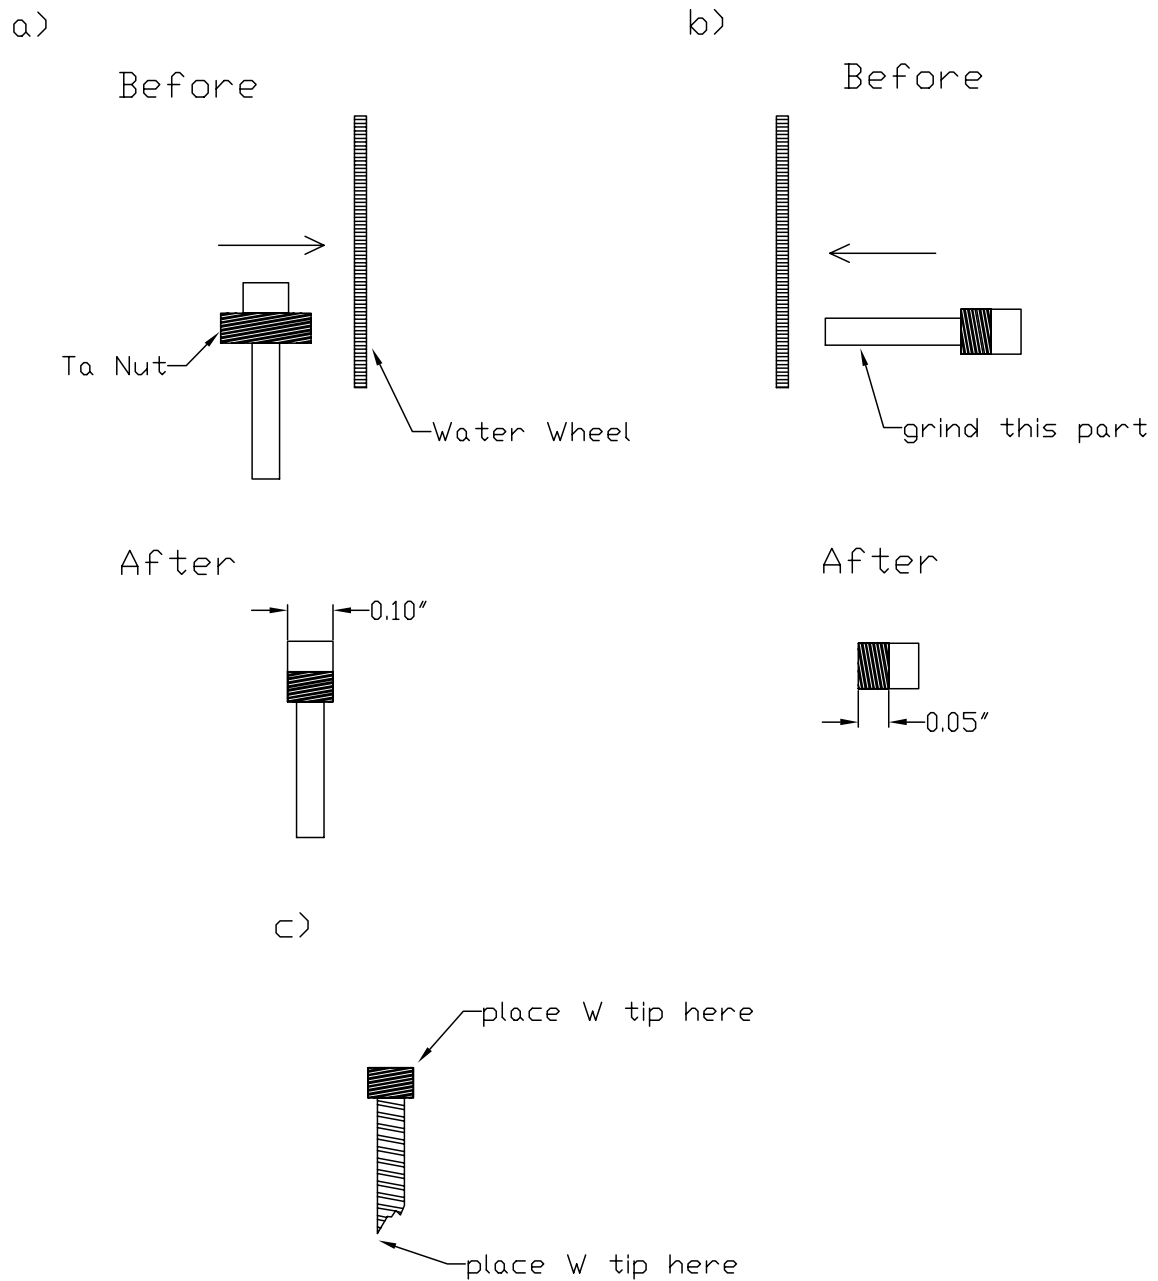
a) Grinding the Ta nut so it is as wide as a regular screw head. b) Grinding the Ta nut so that it is as thick as a regular screw head. c) Spot welding the Ta nut and threaded rod.
